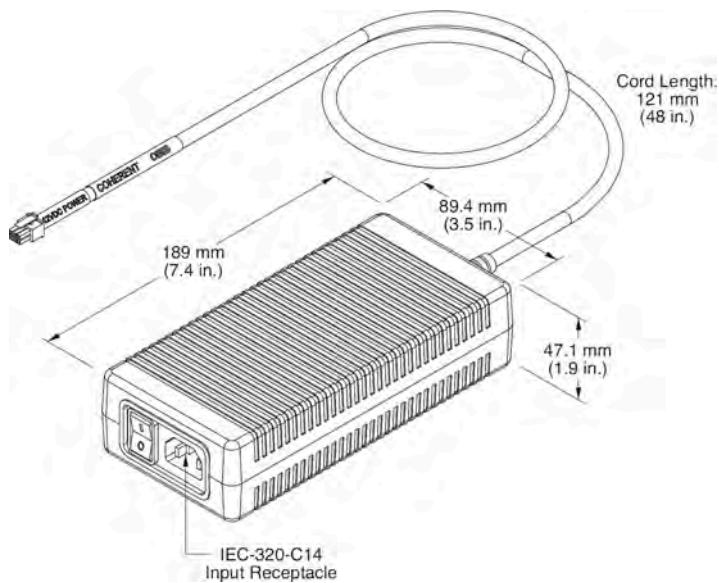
OBIS 6-Laser Remote Power Supply Dimensions
